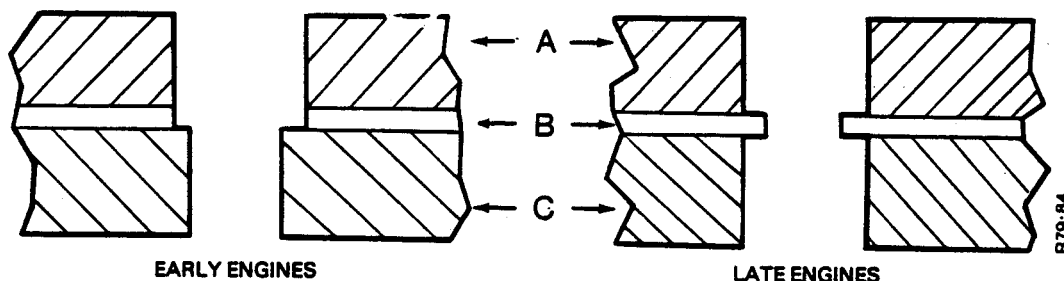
CYLINDER BLOCK AND CYLINDER HEAD GASKET
